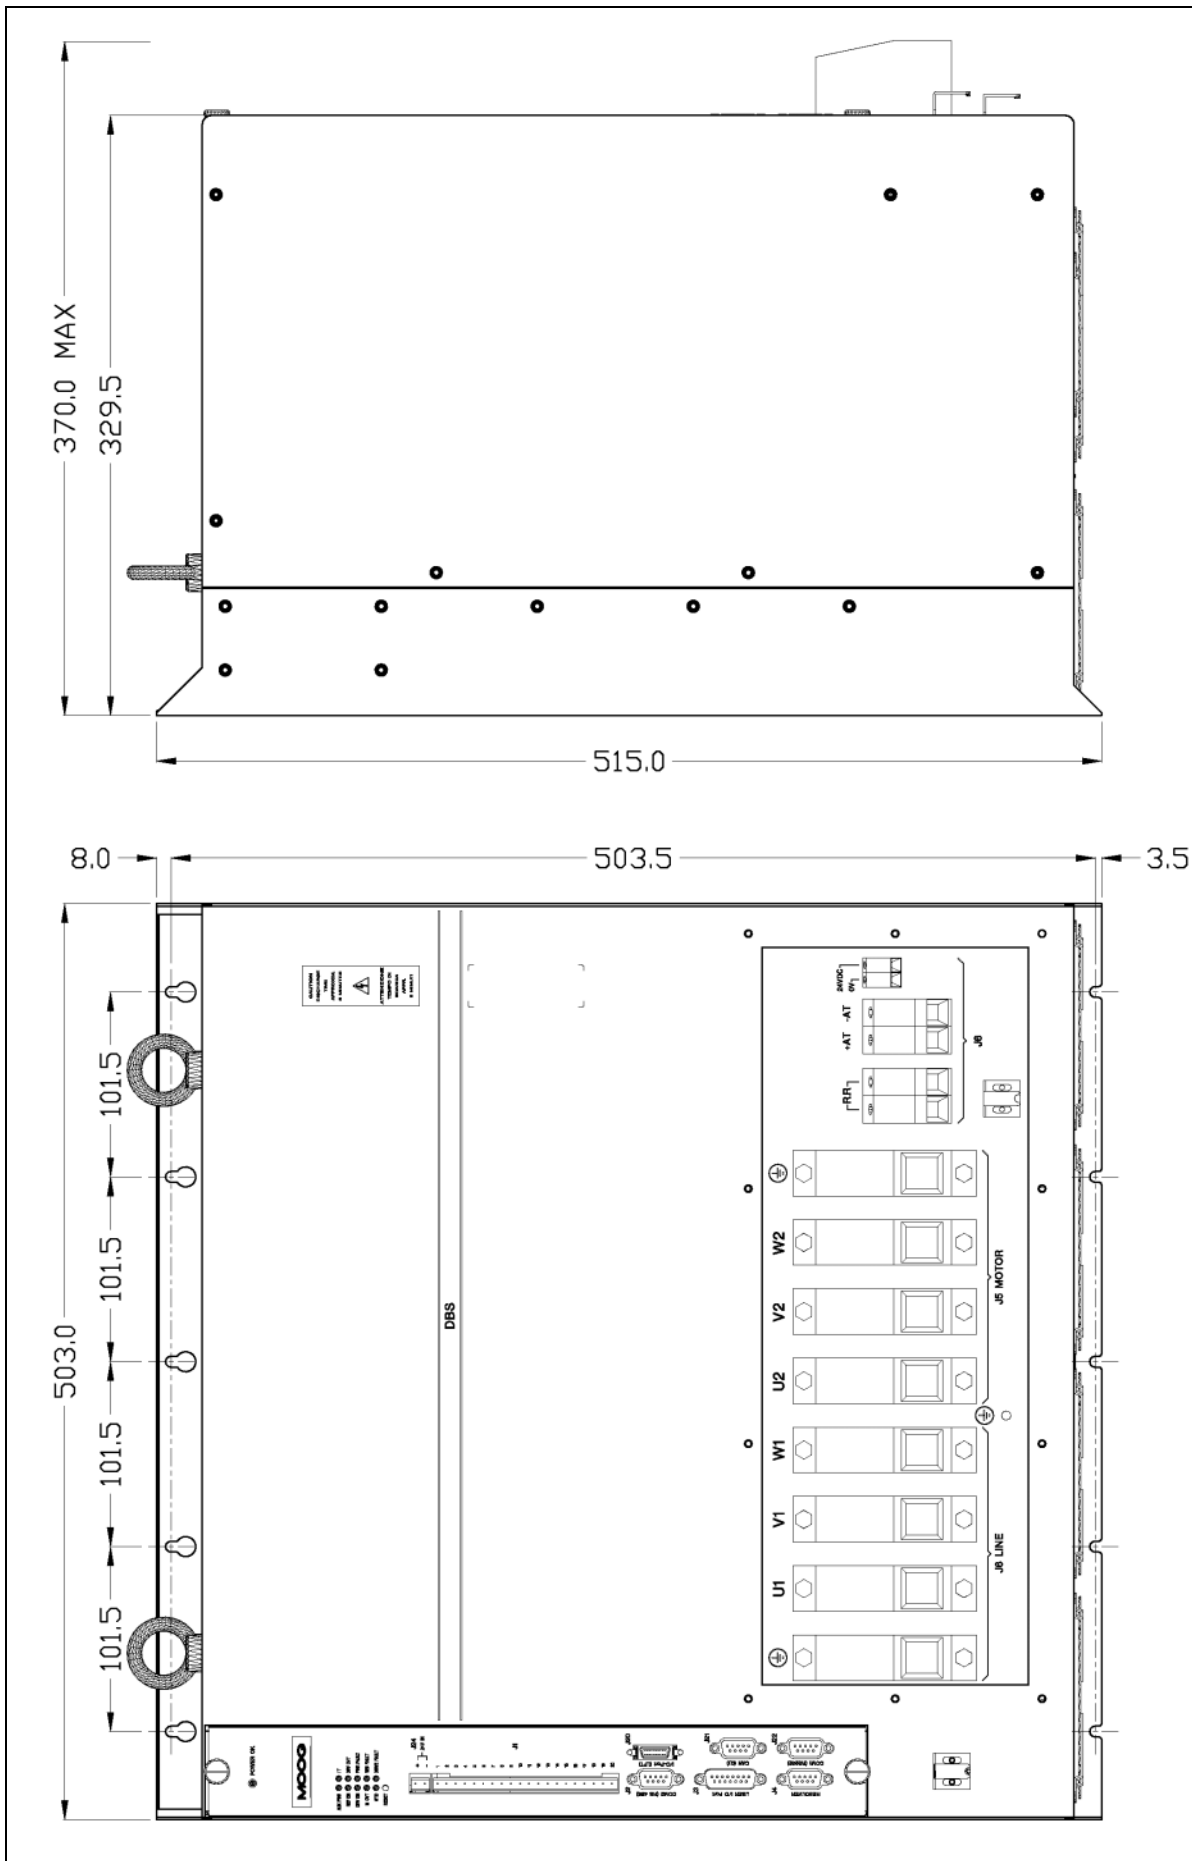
A IDBS W120/240 - Dimensions and Drilling Jig (Drill For M5 Screws)
